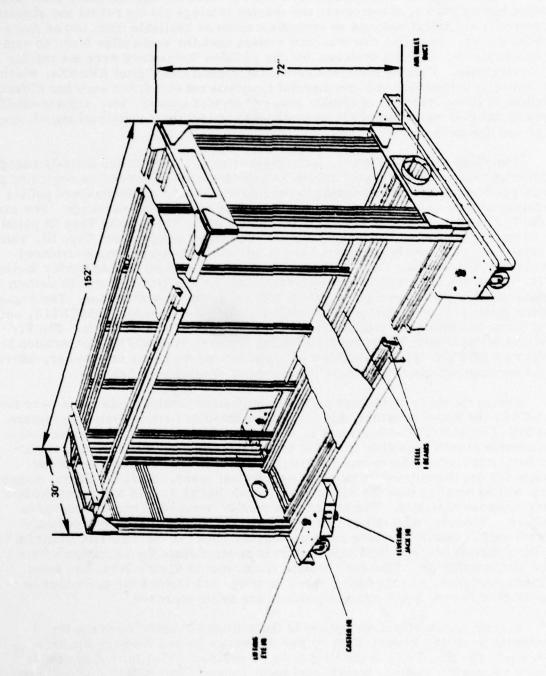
Rack System Outlines for TTC-39 Fixed Plant Installation
